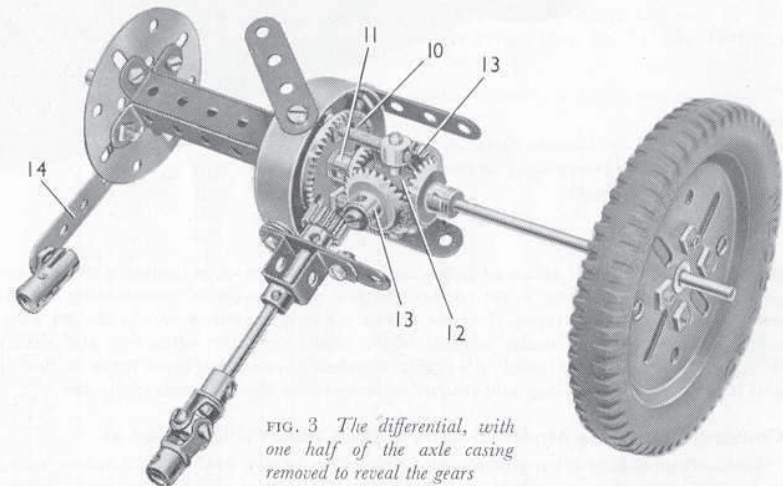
The differential, with one half of the axle casing removed to reveal the gears
